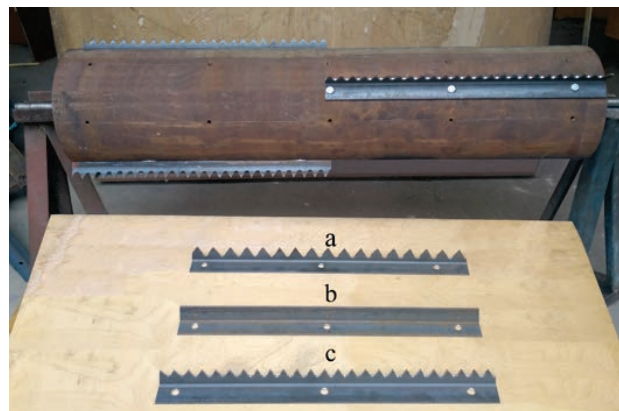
Intermediate threshing drum and options of additional drum bars:
